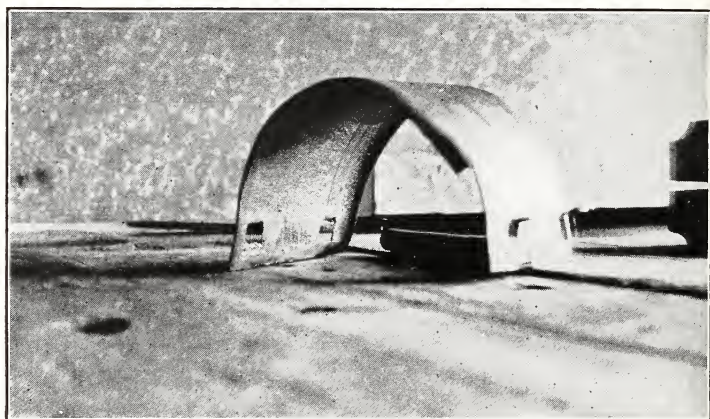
A “quick detachable” belt guard for surface grinding machine.
